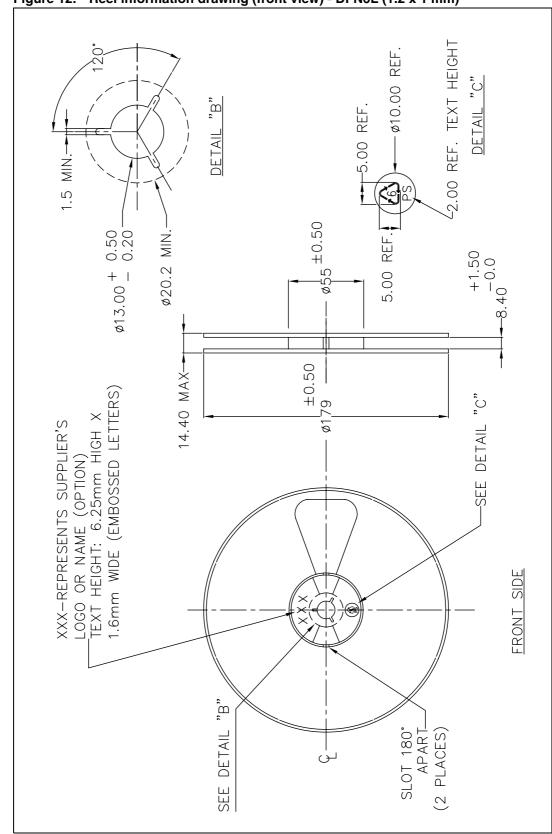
Reel information drawing (front view) - DFN6L (1.2 x 1 mm)
